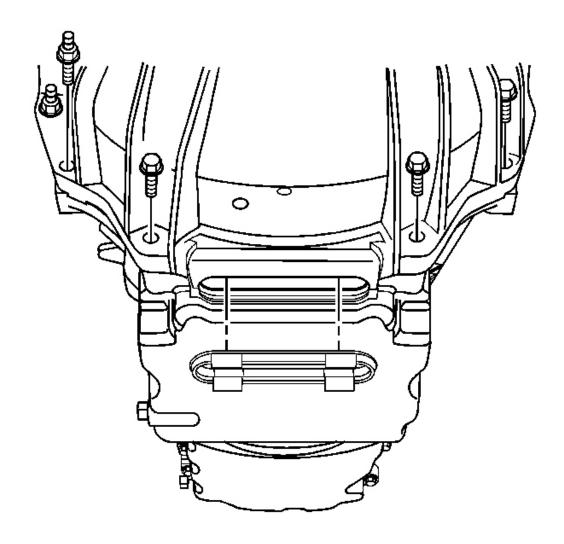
View Of Transmission Mounting Bolts Courtesy of GENERAL MOTORS CORP.
